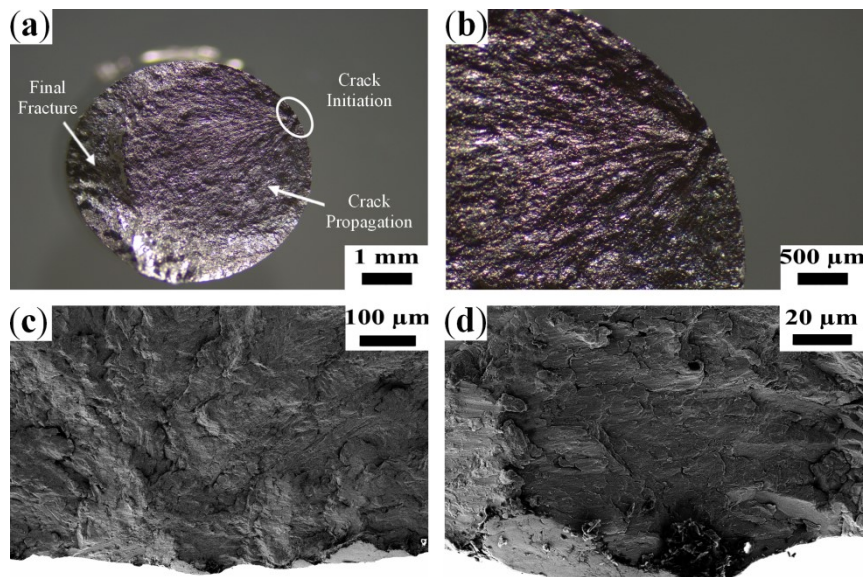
Fatigue fracture surfaces of horizontal stress relieved and heat treated Ti-6Al-4V specimen observed by stereomicroscopy (a,b) and FESEM analysis (c,d): (a) overall fracture surface showing the crack initiation site, the crack propagation and final fracture areas; (b-d) crack initiation site observed at progressively higher magnification.
